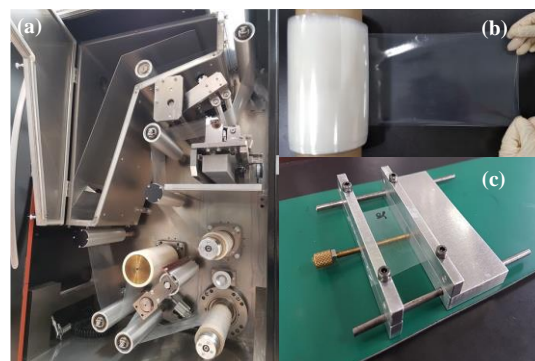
(a) Roll-to-roll coating machine (reverse gravure coating, µCoater350, Yasui Seiki, Kanagawa, Japan), (b) coated PVA film and (c) Customized uniaxial stretcher.
